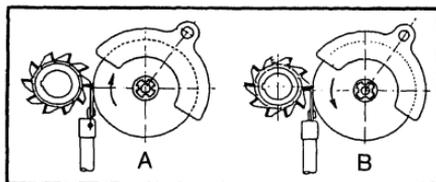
Tool grinding setups on a tool and cutter grinder. (A) Straight wheel grinding a milling cutter. (B) Cup wheel grinding a reamer.
